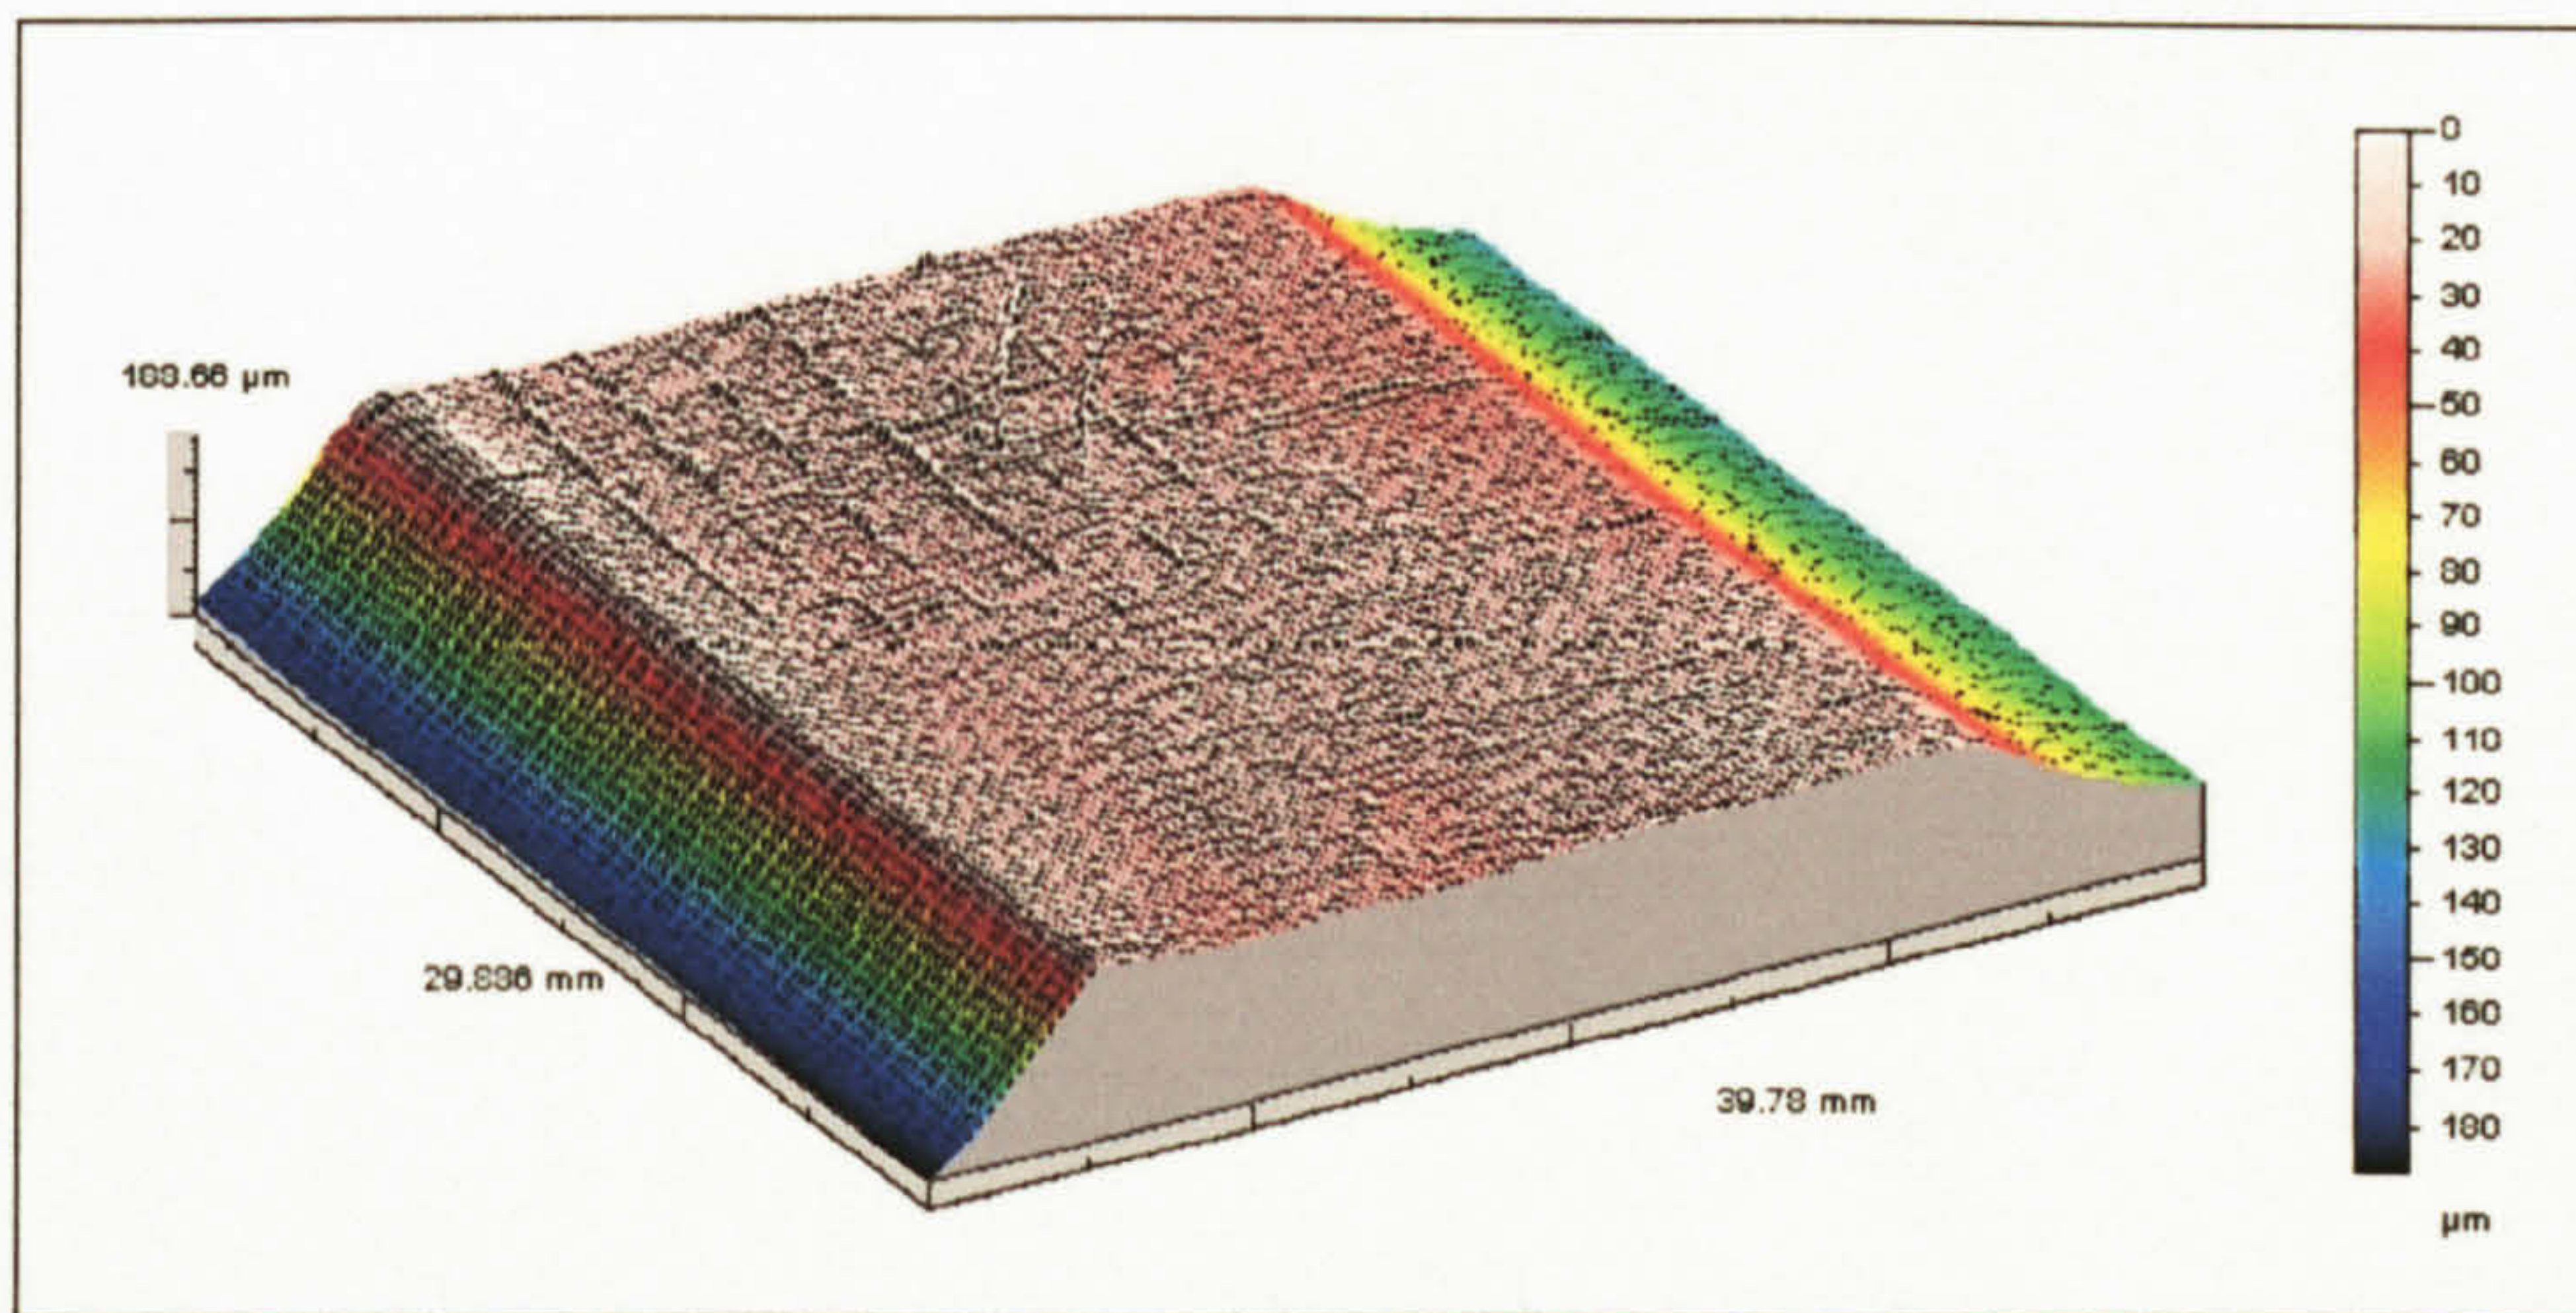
Three dimensional representation of the backing plate side geometry of the FS SP weld (the marks in the upper left quadrant are due to abrasions that occurred post weld).
